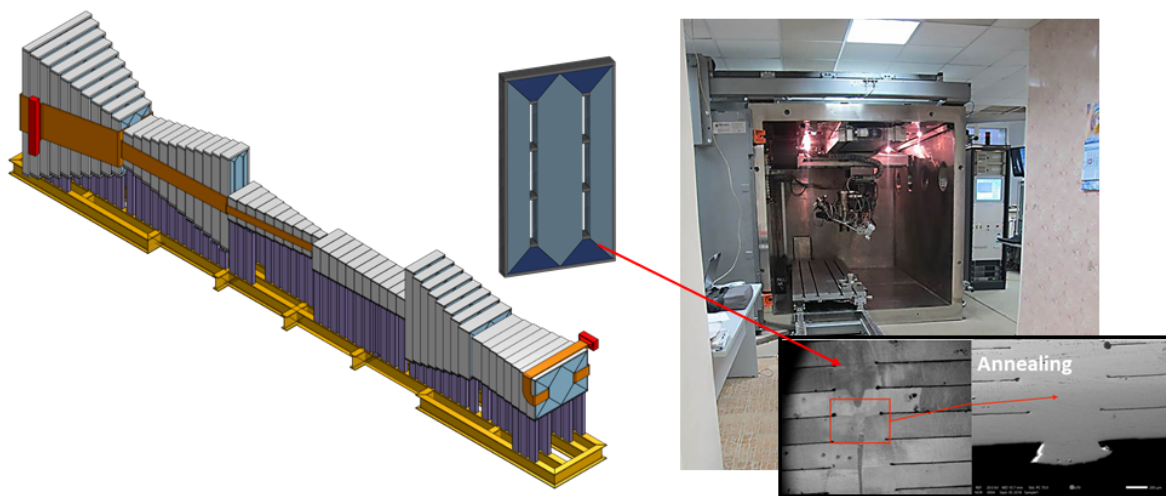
Left: layout of the free-standing part of the muon shield. Right: electron beam welding in a vacuum chamber and annealing tests on small scale prototype.
